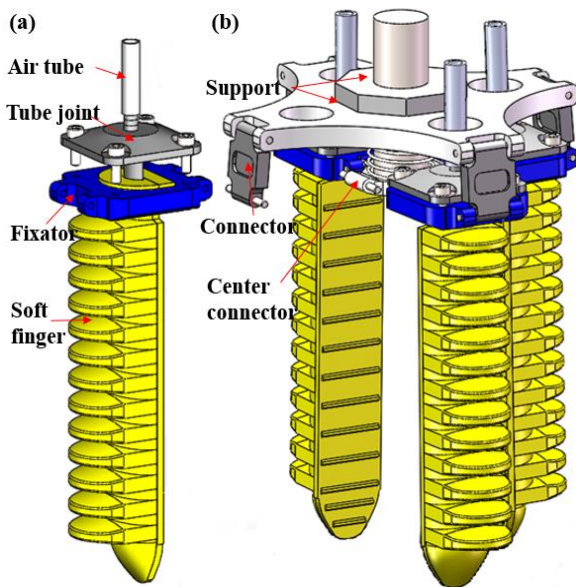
The design of the soft robotic gripper. (a) The soft finger element, composed of four components: the air tube, the tube joint, the fixator and the soft finger. (b) The 3D structure of the soft robotic gripper. The soft finger elements were connected to the support using connectors
